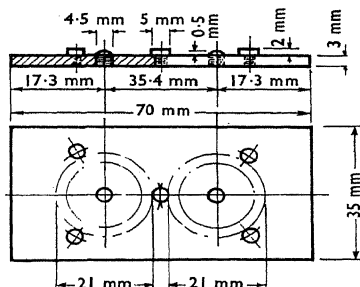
Ring and Ball Test for Pitch—Moulding Plate.
